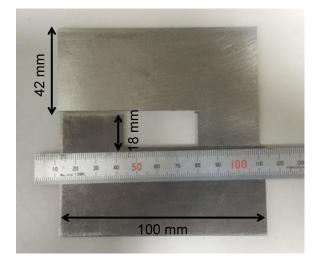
Photo of special jig for ODS/F82H dissimilar friction stir butt joint.
